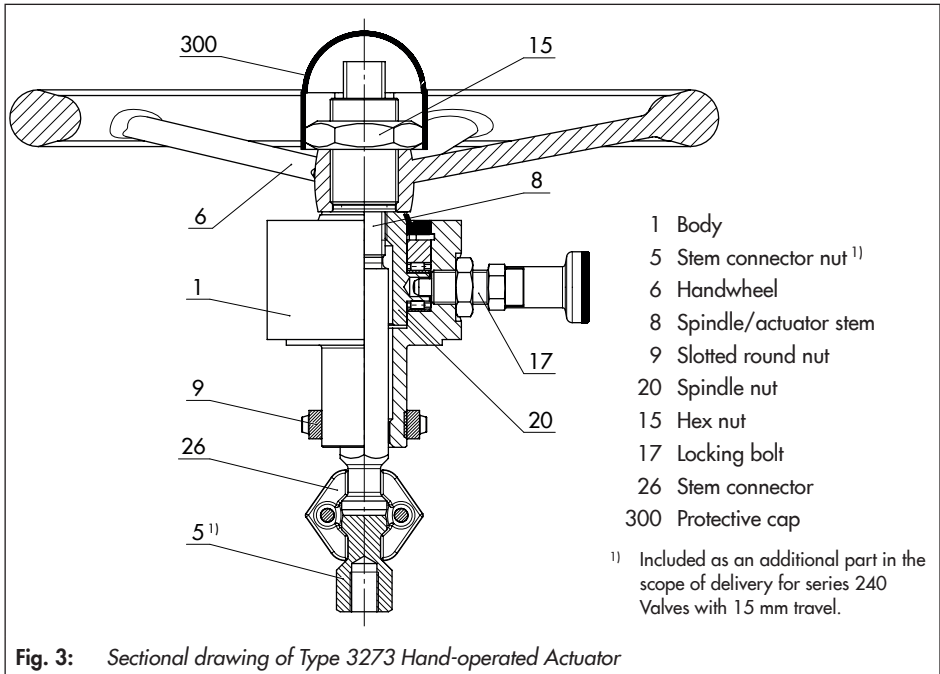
Sectional drawing of Type 3273 Hand-operated Actuator
